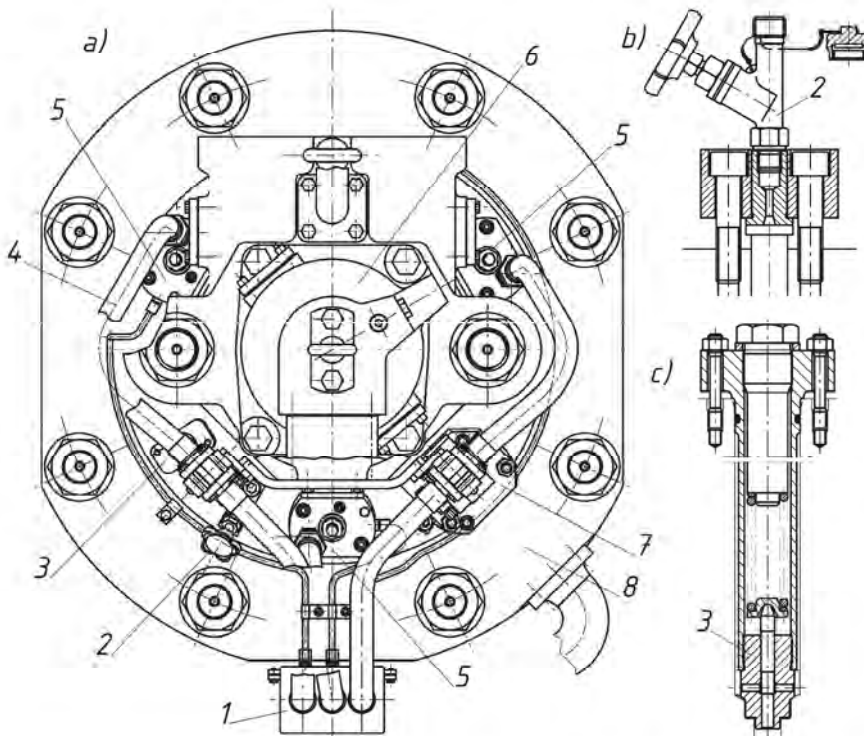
Equipment of the cylinder cover of the two-stroke diesel engine RTA 72UB (*a*); indicator tap (*b*); relief valve (*c*). 1 – fuel distributor for injectors; 2 – indicator tap; 3 – relief valve; 4 – high pressure pipe; 5 – injection valve; 6 – exhaust valve drive; 7 – air start valve; 8 – cover flange (adapted from [18])
